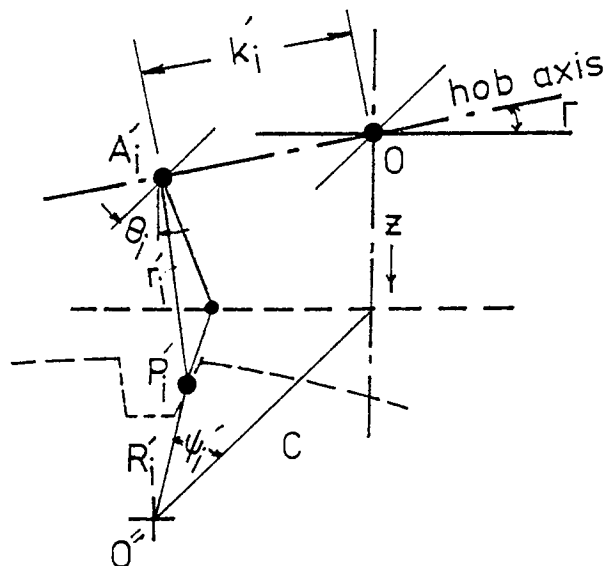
LOCATION OF SIDE EDGE CONTACT POINT
